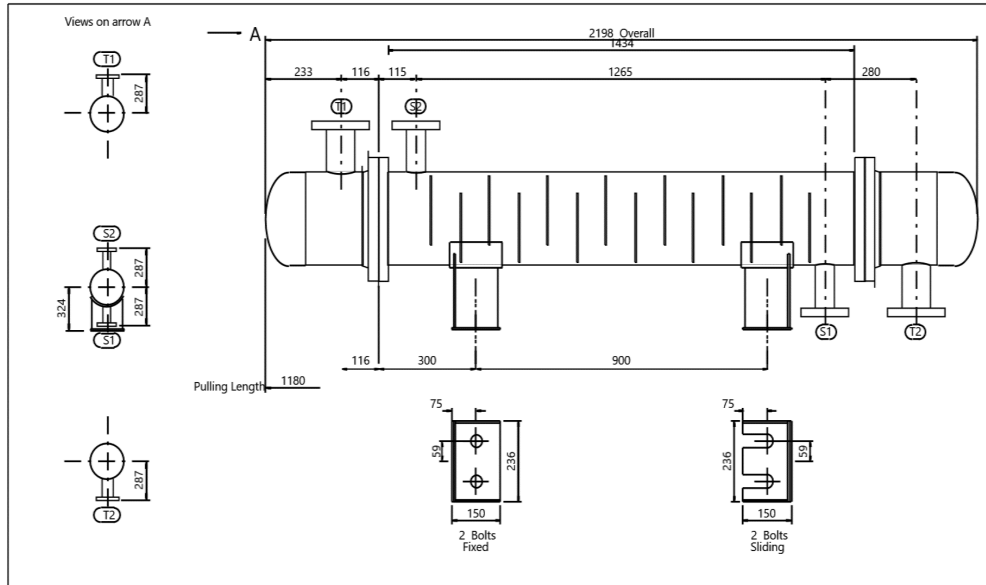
Geometry of the shell and tube heat exchanger designed as heater.
